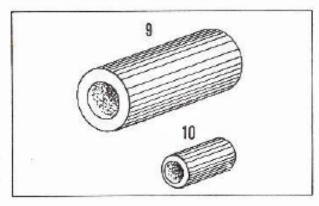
Using the driving sleeve tool #10 tap into place the fork seal and finally with sleeve tool #9 insert the shift shaft housing seal.
